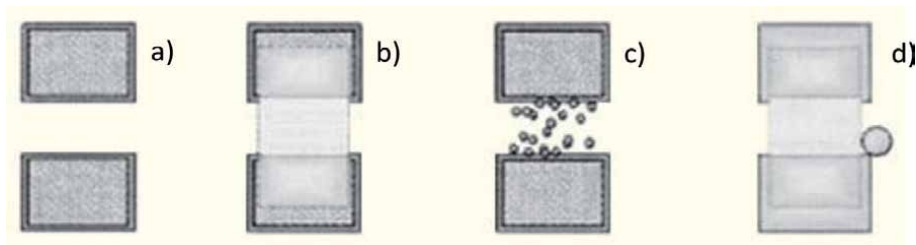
Schematic representation of the principle of balls forming next to the component's package: (a) solder paste deposited on solder pads (b) mounting the component (c) during reflow particles of solder paste partially agglomerate (d) a ball forms next to the component's package.
